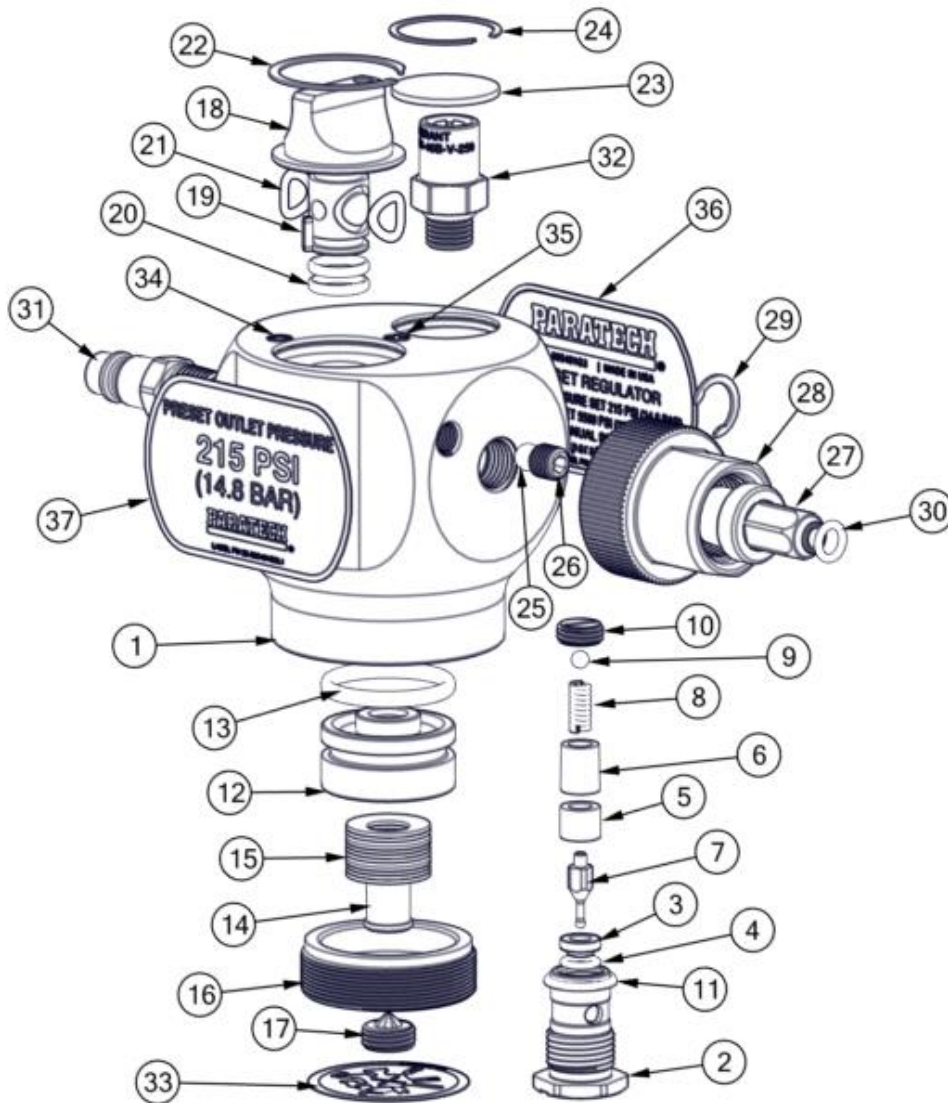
22-895401G3 Regulator, ALB G3 Preset CGA Exploded View
